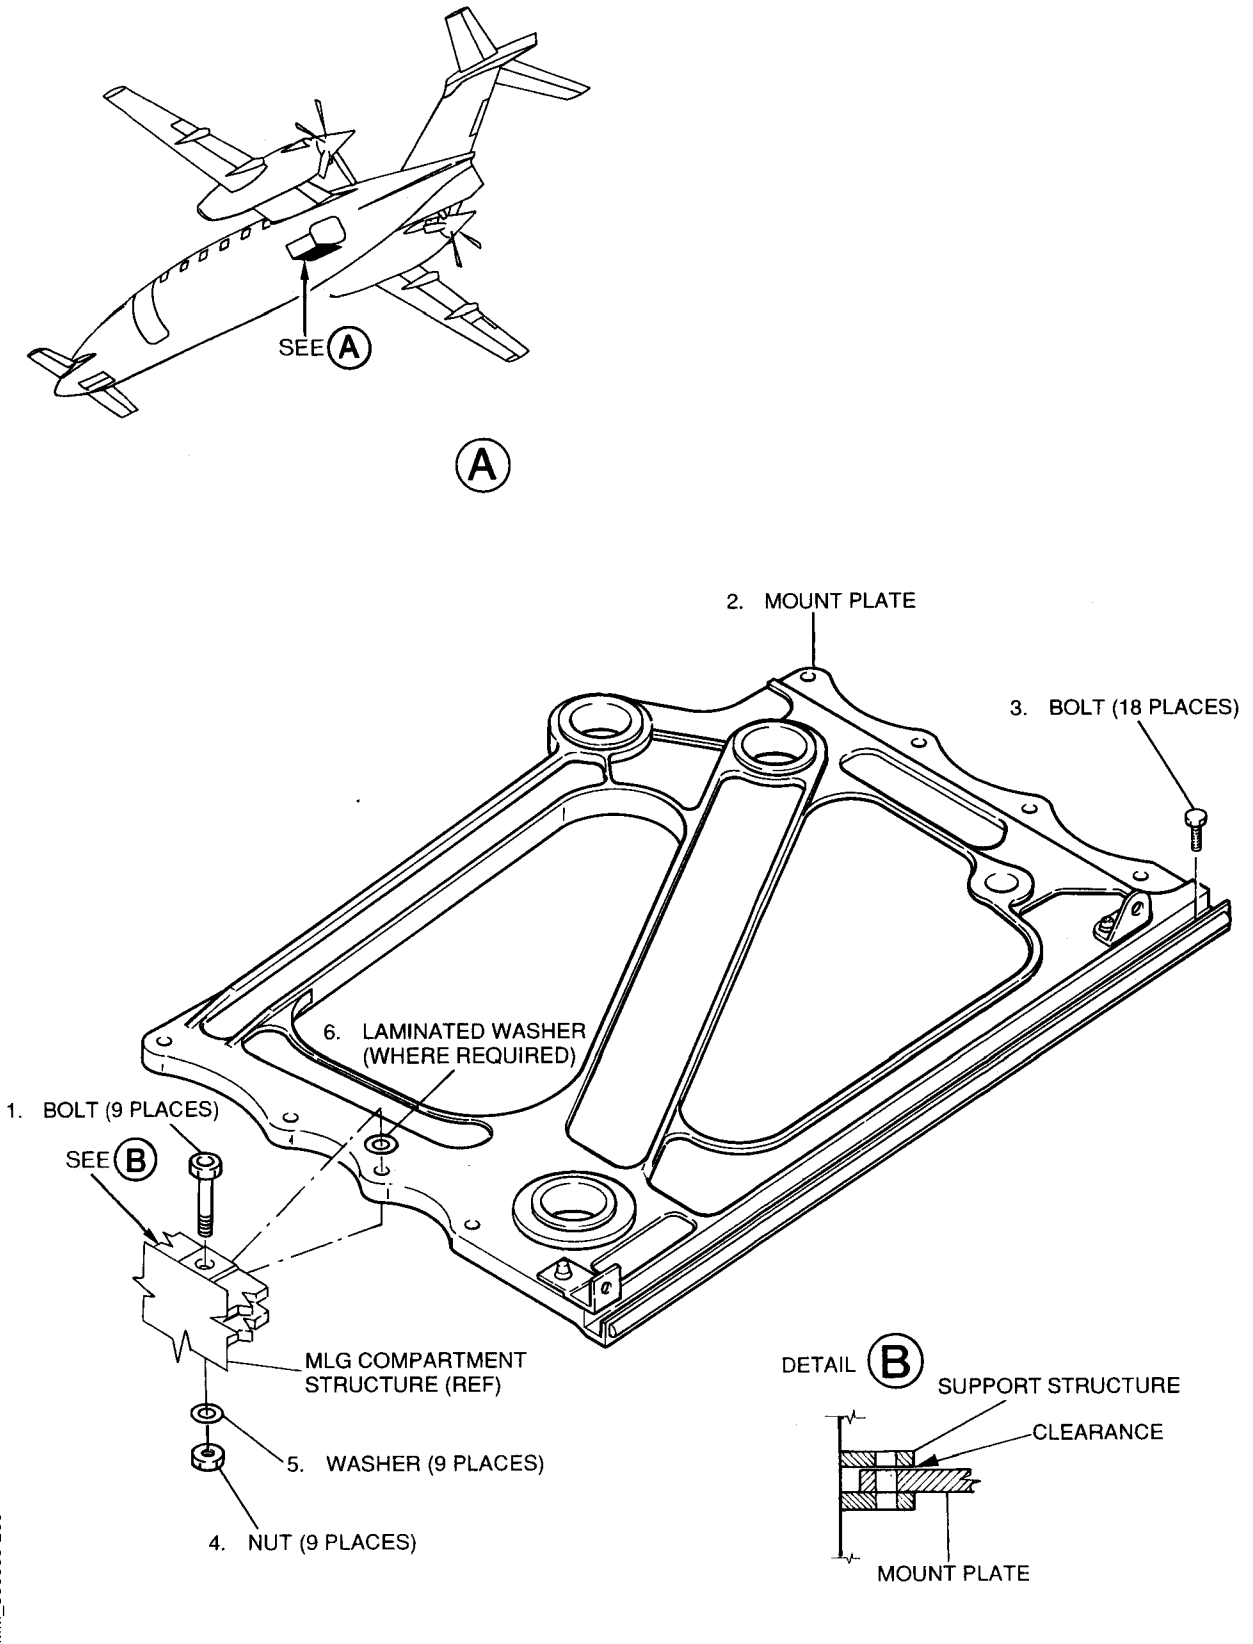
MLG Lower Mount Plate - Removal/Installation
